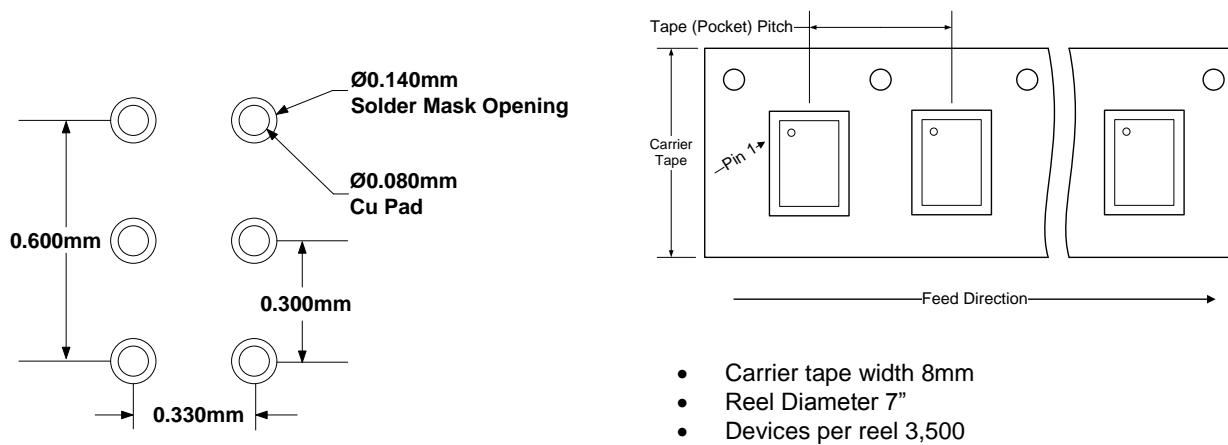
PCB Layout Footprint / Tape and Reel Information
